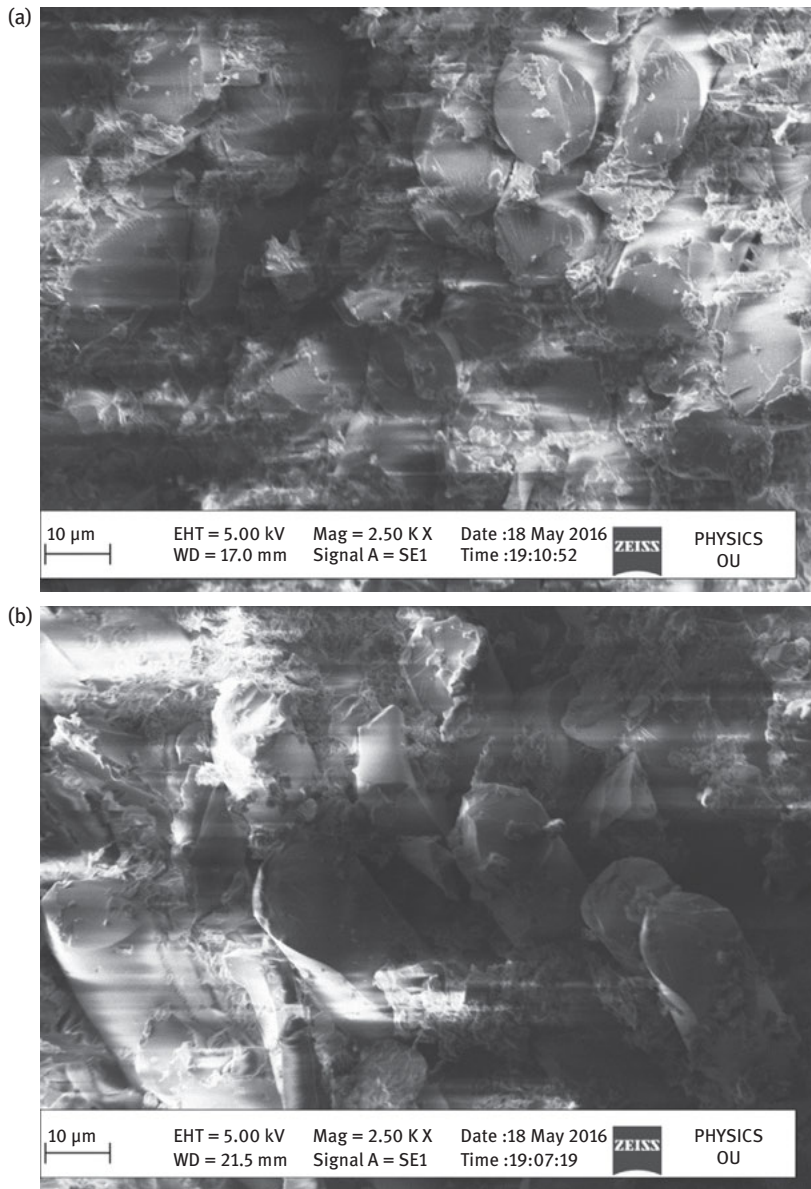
Surface damages of machined UD-GFRP laminates: (a) DOC = 2 mm, tool RA = 15° and FO = 0° and (b) DOC = 2 mm, RA = 15° and FO = 90°.
